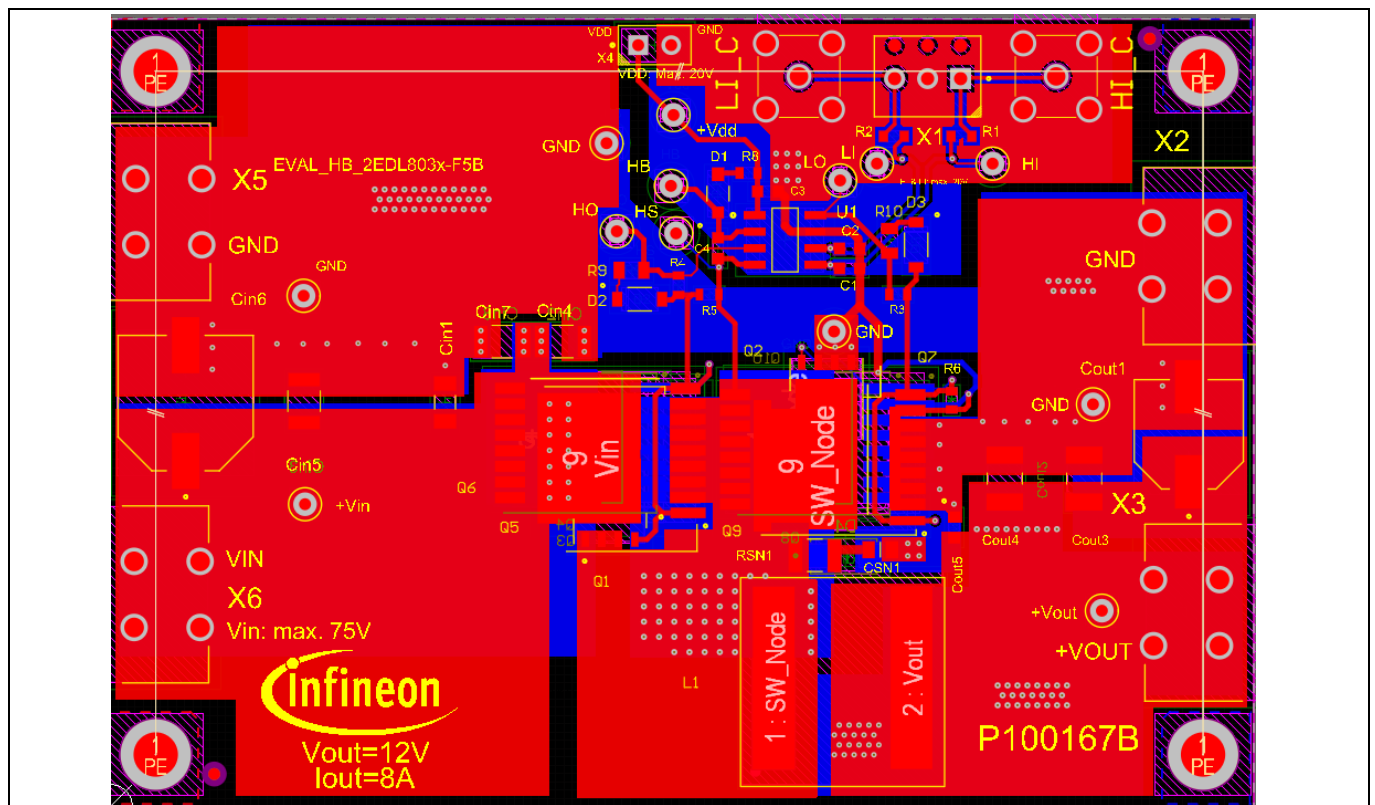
EVAL_HB_2EDL803x-F5B board layout
